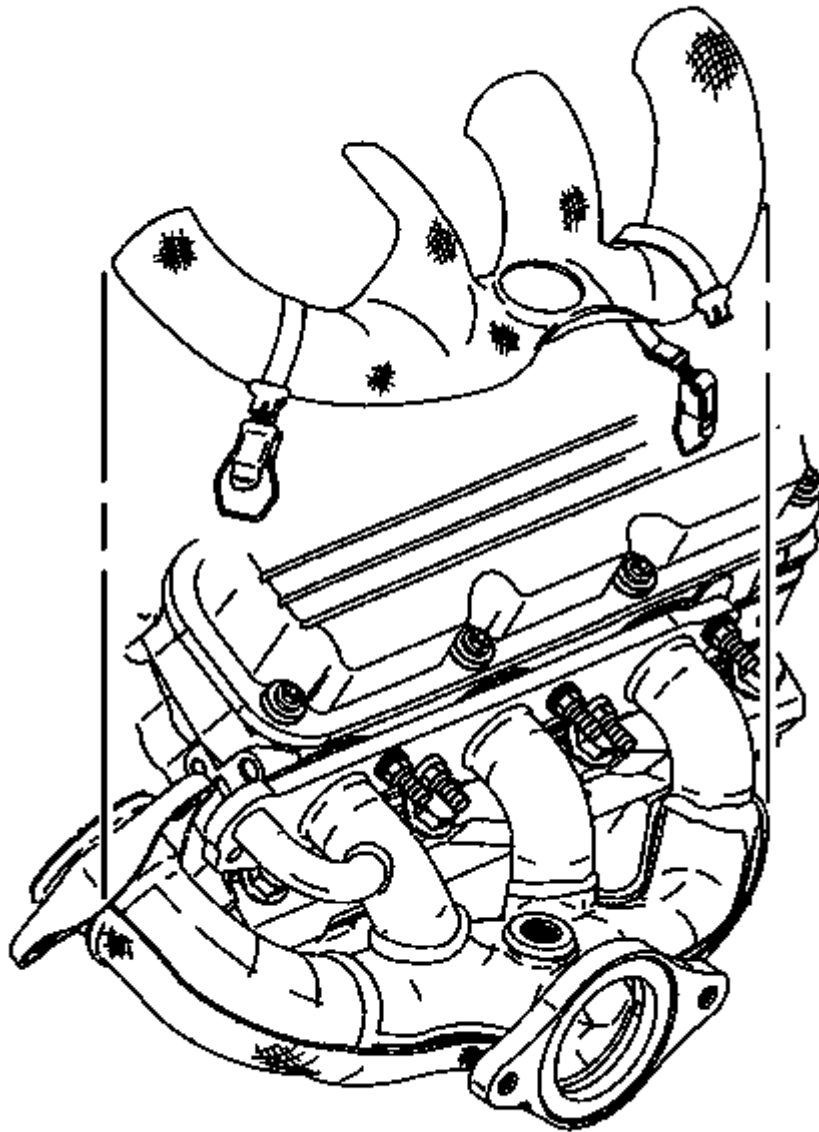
Upper Right Exhaust Manifold Heat Shield (3.8L)
